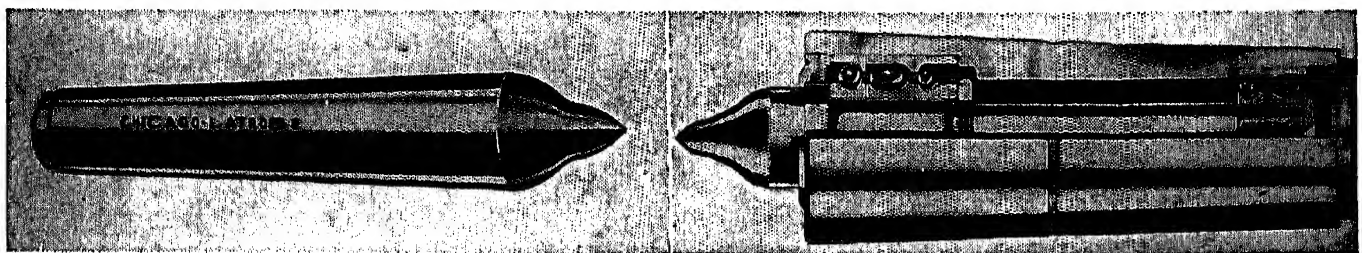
(left) A solid center. (Courtesy Chicago-Latrobe Twist Drill Works.)
